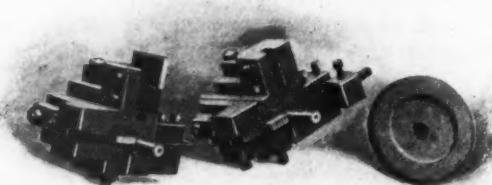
TOOLS FOR BEVEL GEAR BLANKS.
